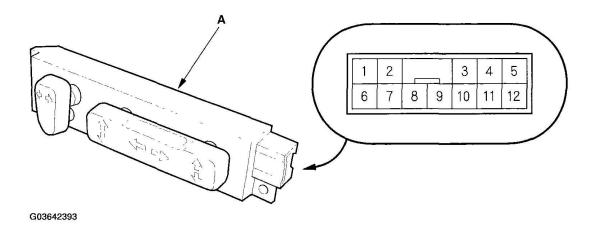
Disconnecting 12P Connector From Power Seat Adjustment Switch Courtesy of AMERICAN HONDA MOTOR CO., INC.
